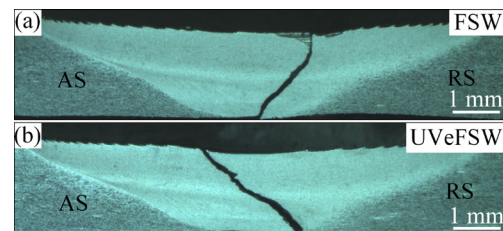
Fracture locations of joints at welding speed of 120 mm/min: (a) FSW; (b) UVeFSW
